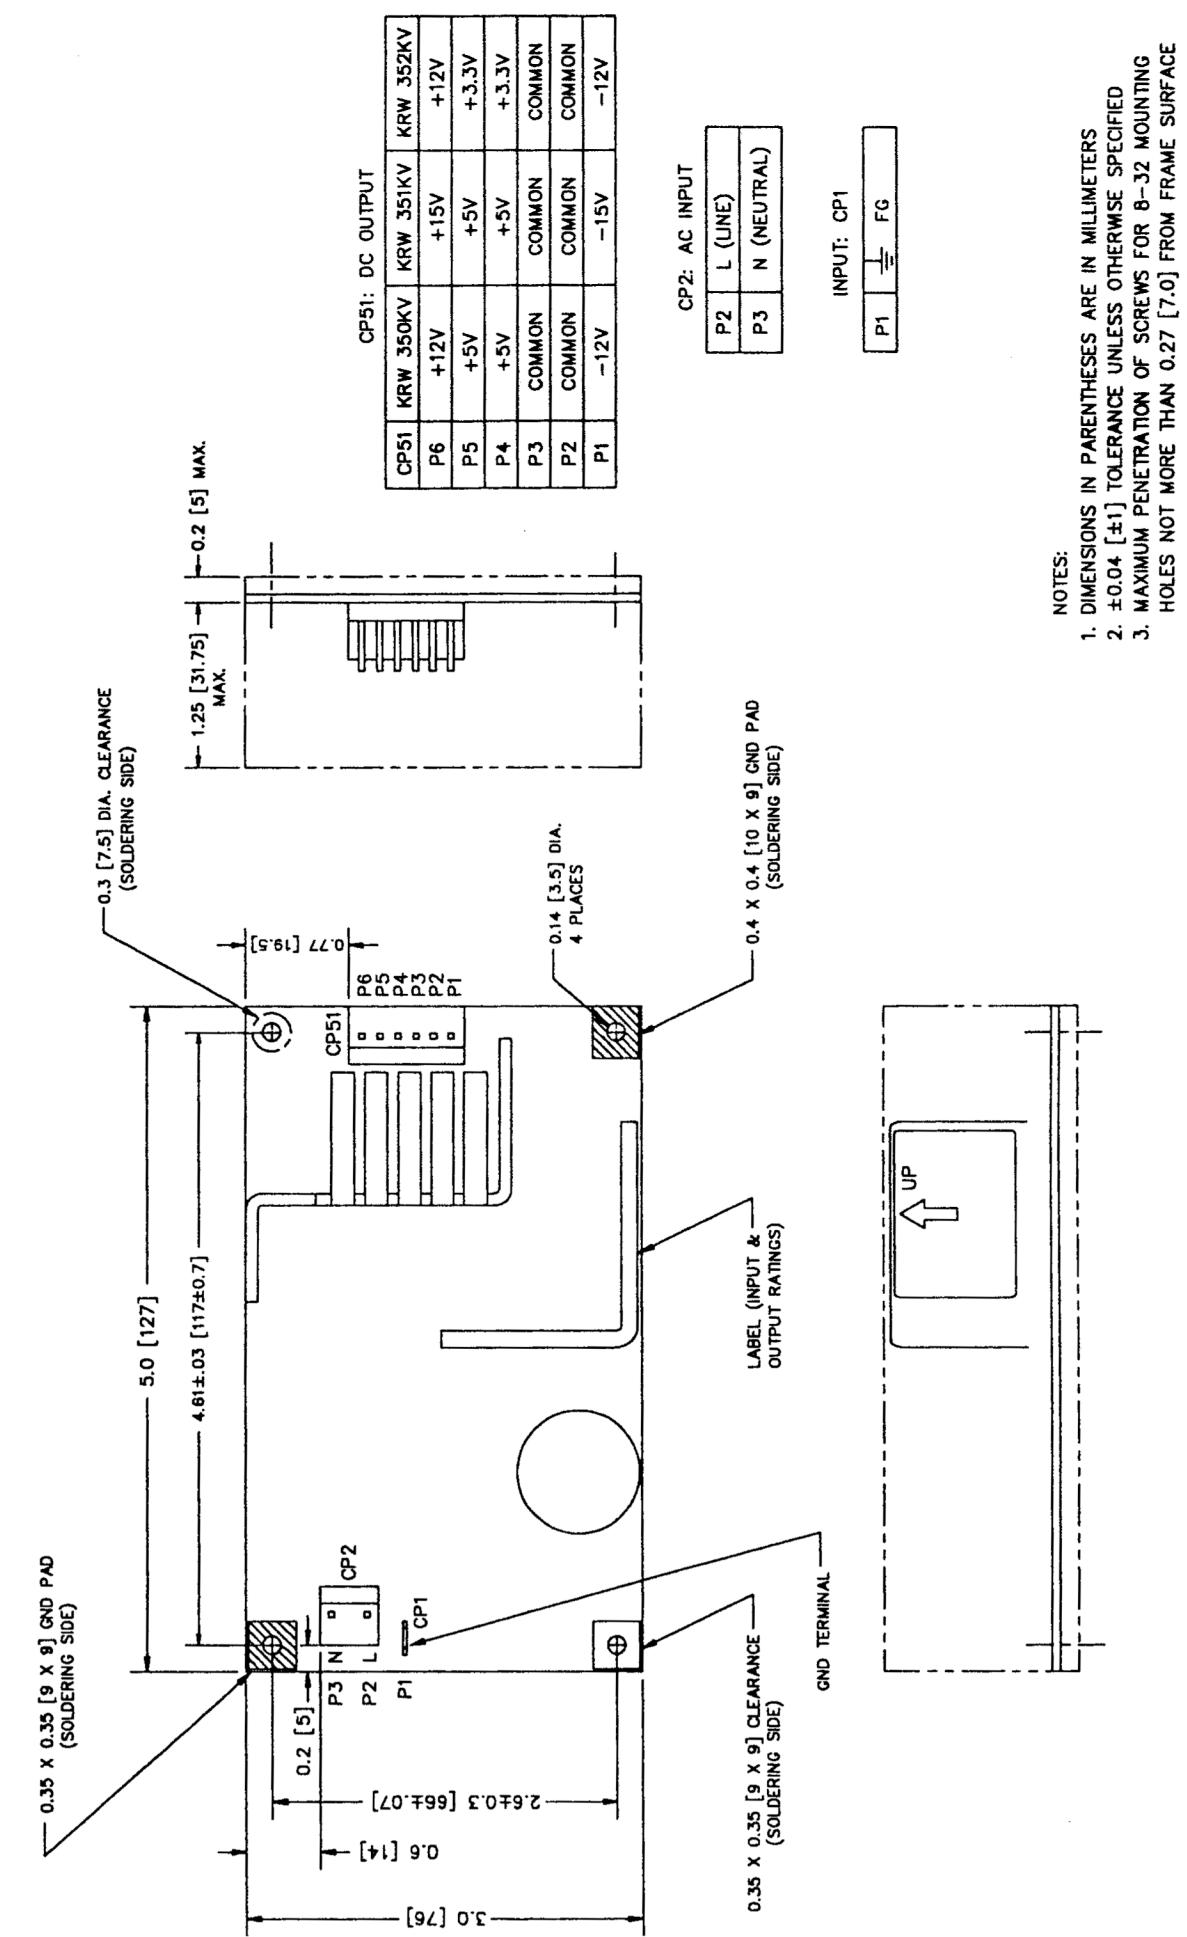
MECHANICAL OUTLINE DRAWING FOR THE KRW 352KV POWER SUPPLY
